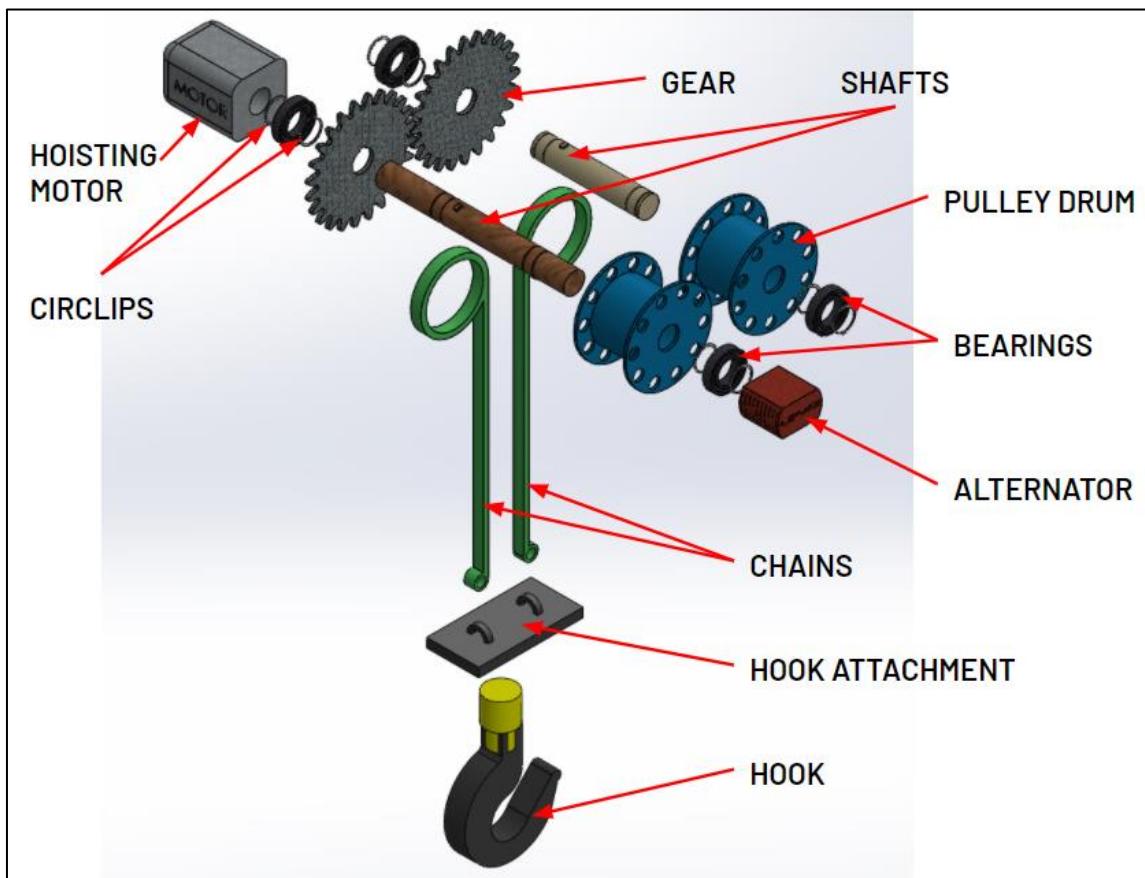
Exploded View of Hoisting Mechanism Subsystem
